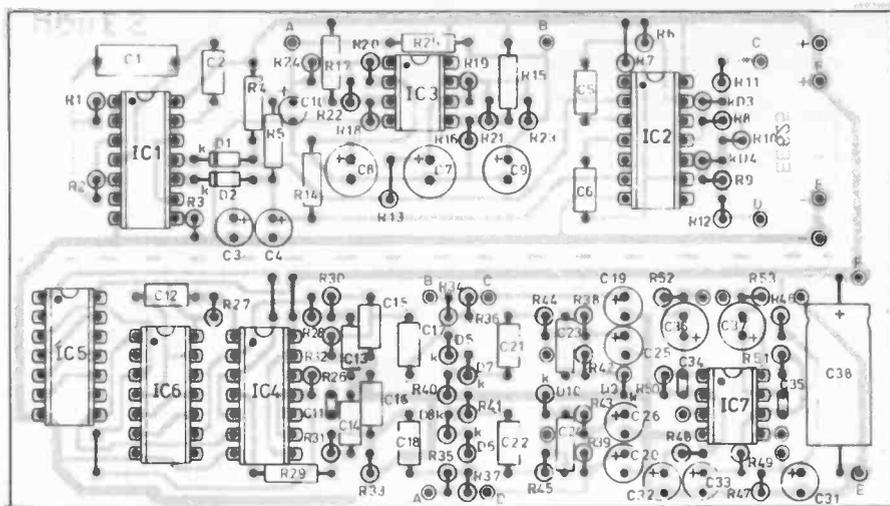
printed circuit board component layout and full size copper foil master pattern. This board is cut in half to form two boards, if using the case specified.
